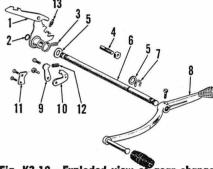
Exploded view of gear change linkage. Lever (1) engages pins (2—Fig. K2-17) and turns the shift drum.
